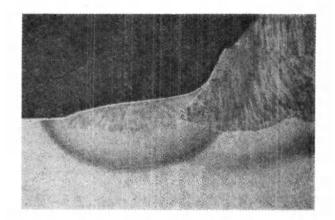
Macrosection of the dressed toe profile, the axis of the TIG torch directed towards the MMA welded toe or bead. Same welding conditions as in Fig. $2(^4) \times 5$.
